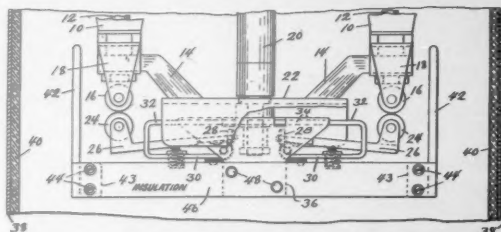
Patent drawing shows contact construction of "D-121" breaker and operation of magnetic blowout coils.
